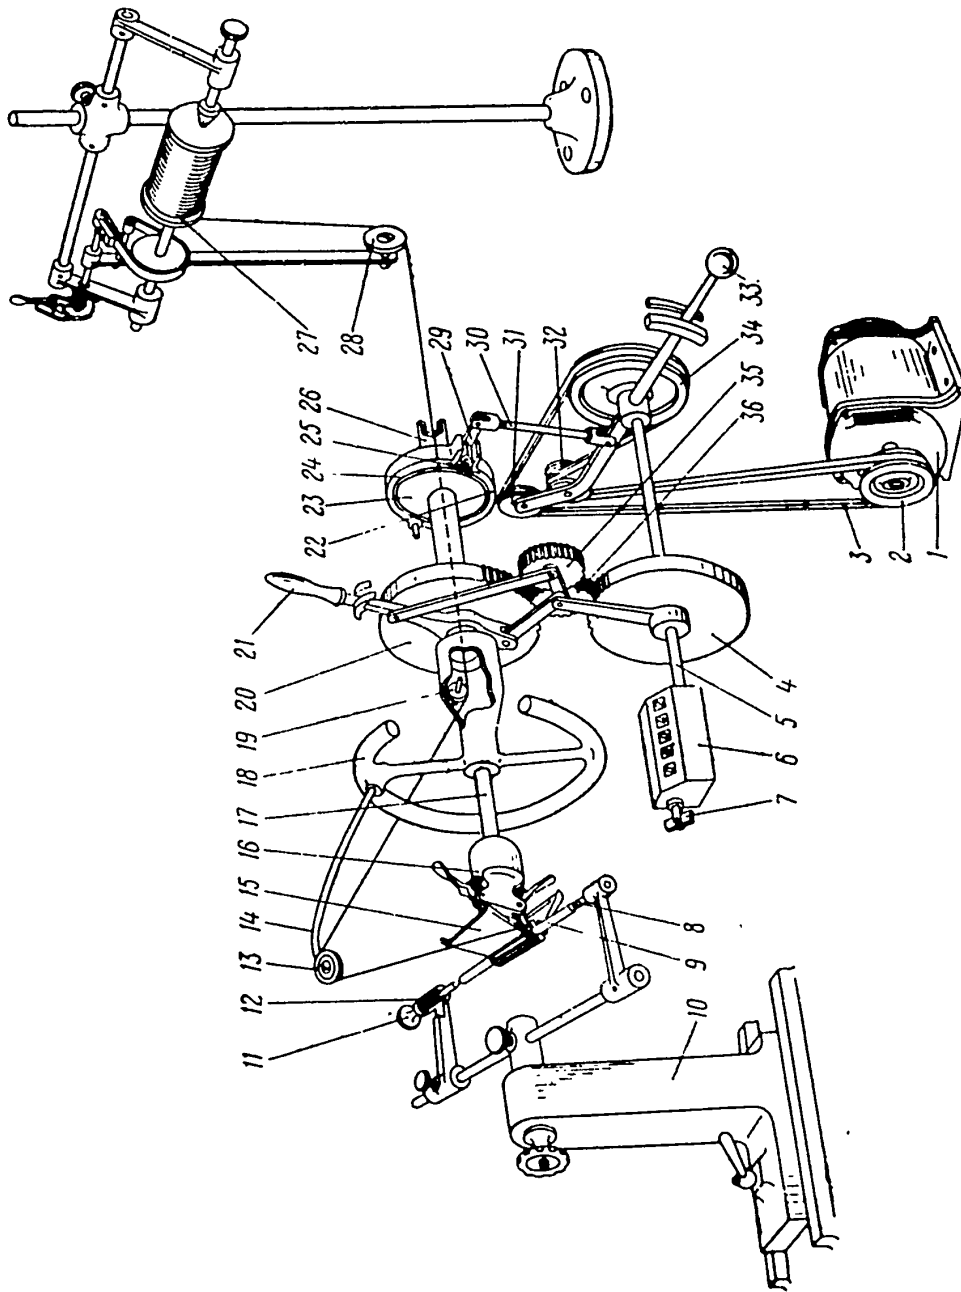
Kinematic Arrangement of Machine for winding of Rotor,
